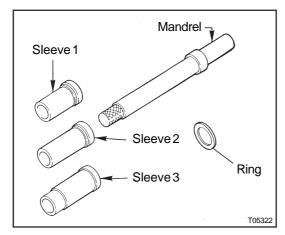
Tool set to remove and install the needle roller bearings and the grease seals
